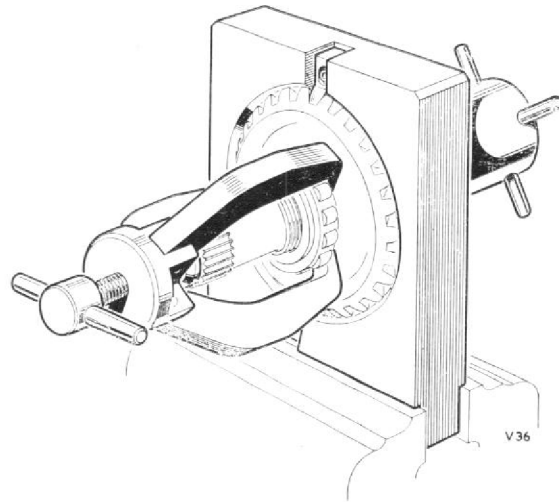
Vice block T.74910 and extractor T.74926, for removing roller inner race from horizontal drive shaft.
